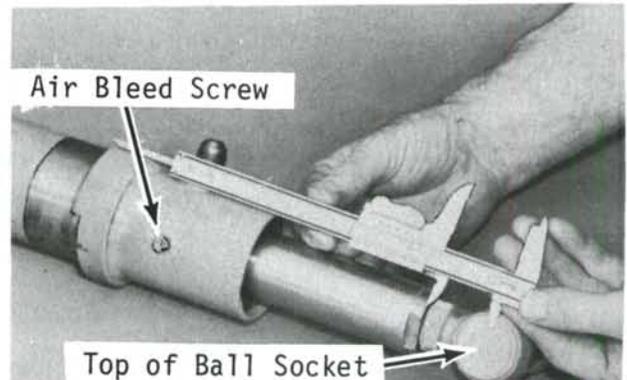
Tie rod ends must be adjusted to obtain correct distance between centers of ball sockets. Refer to text for details.
